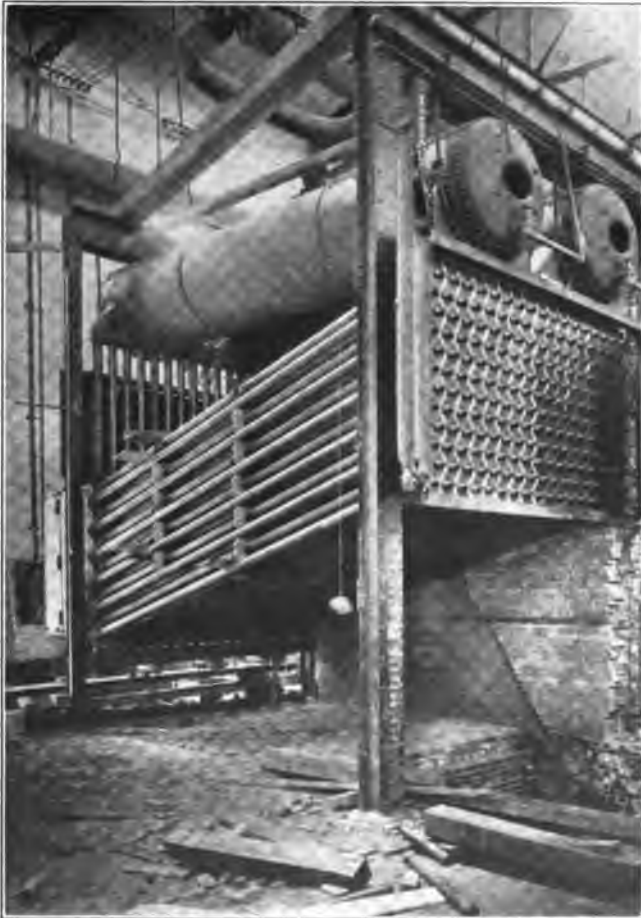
Babcock & Wilcox boiler in course of erection showing how headers fit into one another.
